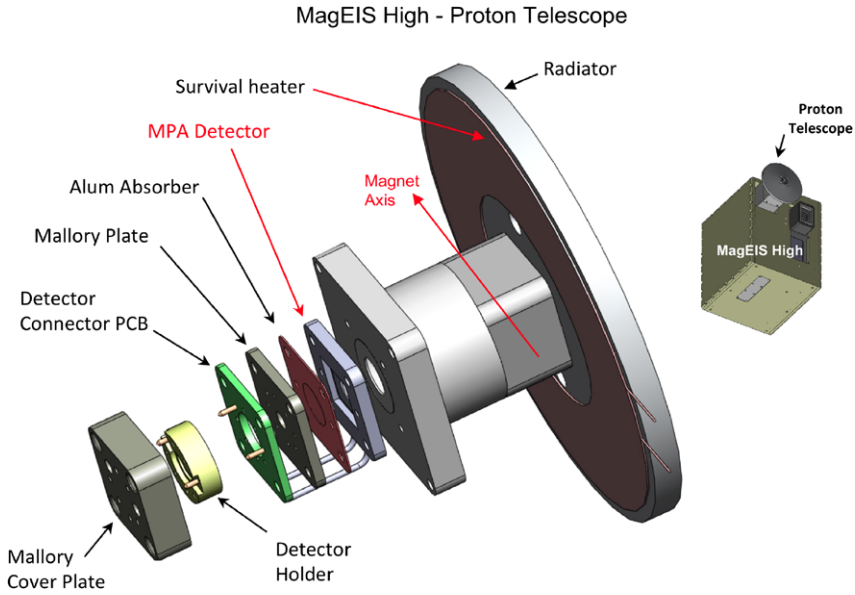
An exploded view of the mechanical configuration of the proton telescope
